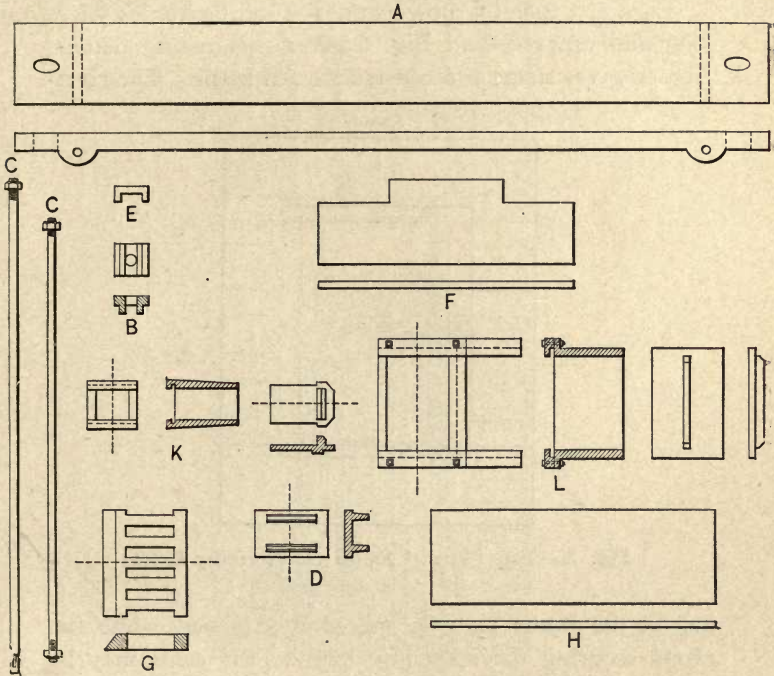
Casting Details of Large Galvanizing Kettle.
